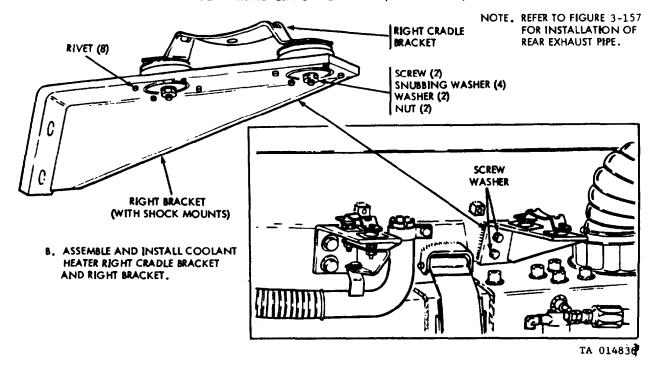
Installation of winterization kit - 11678893 coolant heater brackets and front exhaust pipe
